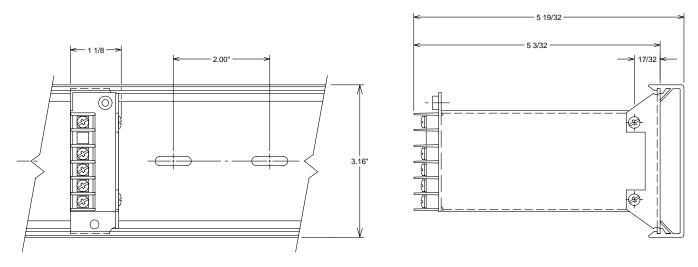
Assembly of 18-215A in a SnapTrack Mounting Rail
